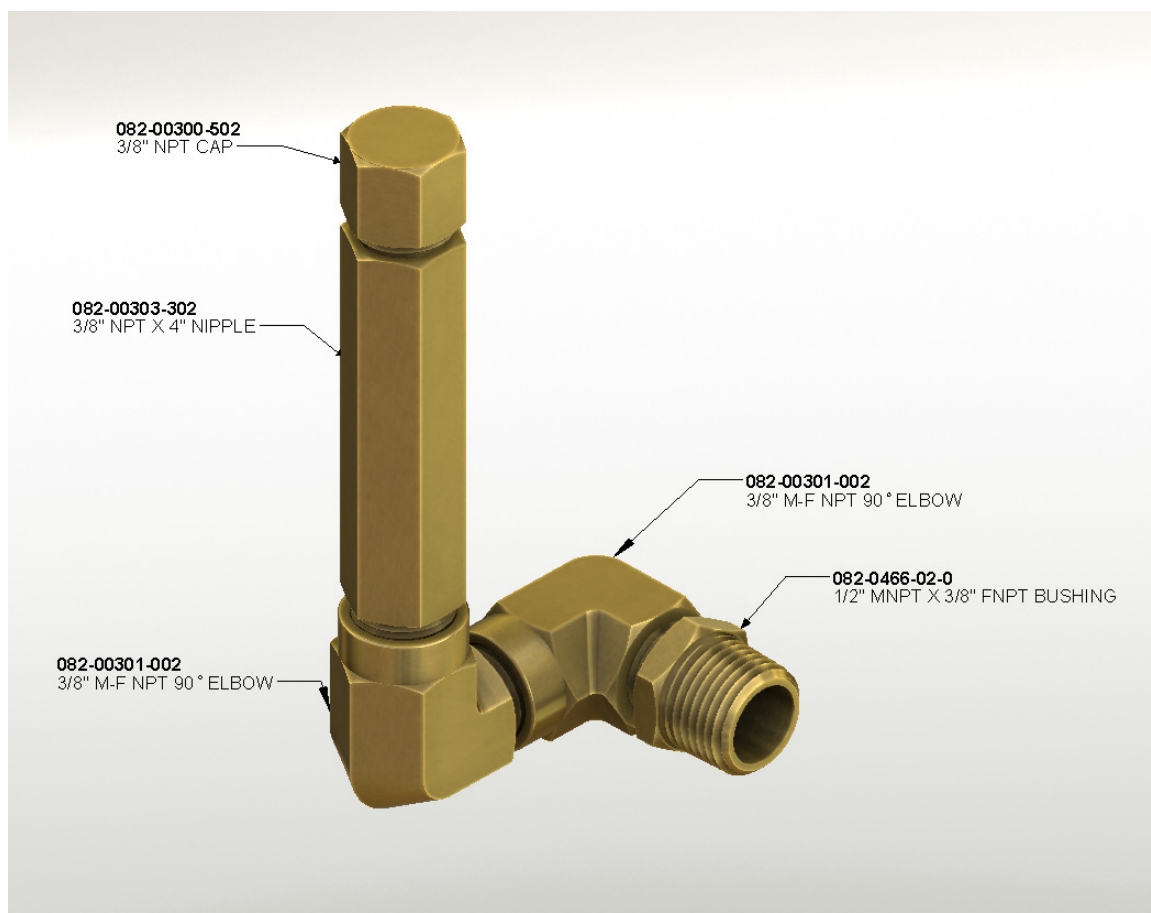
Part Number 582-00025 - Retrofit Kit Assembly
